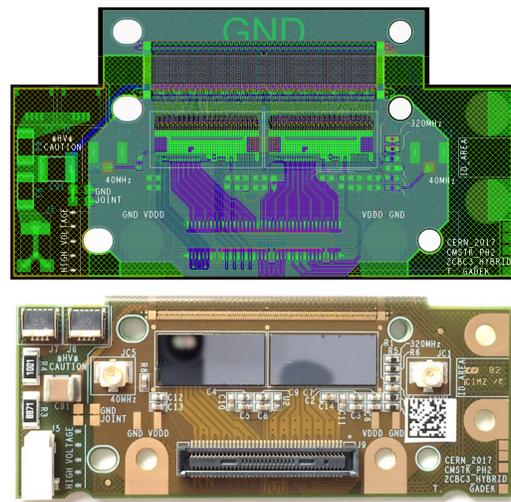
Layout of a 2CBC3 flex (top) and a photo of a folded and assembled 2CBC3 hybrid (bottom).
